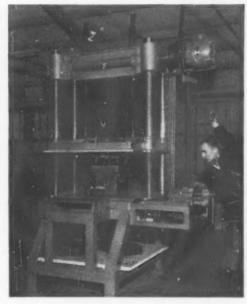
Final Fitting Work on Die Casting Dies is Carried Out with the Aid of this Fonderpressbuilt Die Try-out Machine, on which the Moving Platen can be Actuated Either Manually or Mechanically
